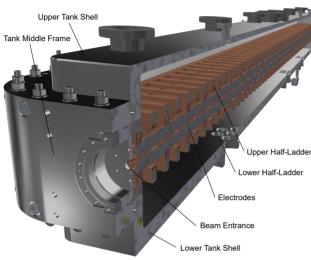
Isometric view of the 3.3 m modulated Ladder-RFQ. Copper carrier-rings guarantee the electrode positioning as well as the RF contact. The ladder structure consists of bulk copper components. Any brazing or welding processes were avoided for the assembly of the main components.
